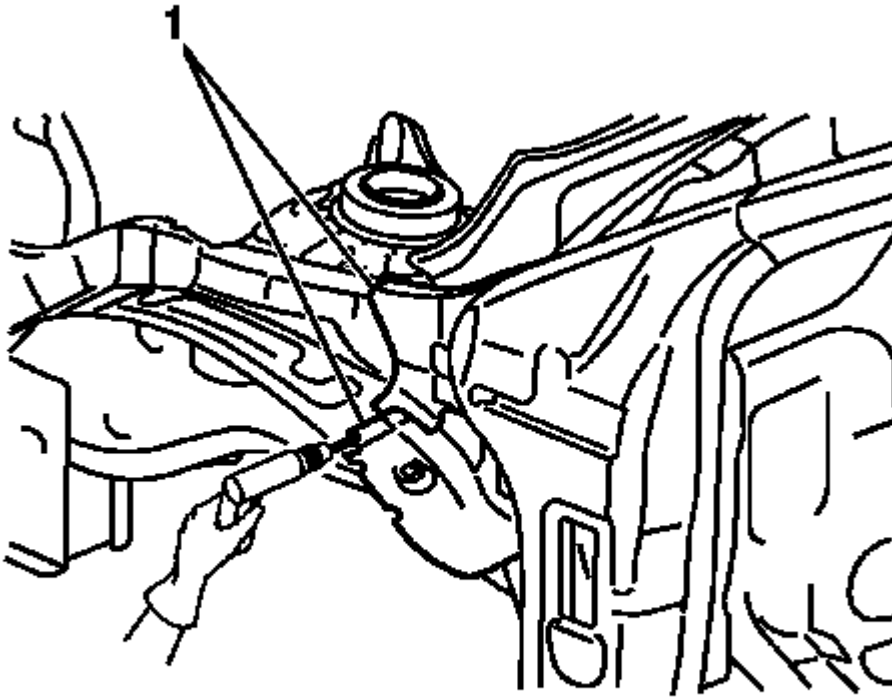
Drilling Out Front Wheelhouse Panel Factory Welds
